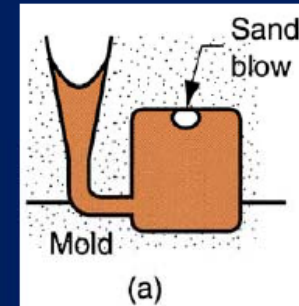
Common defects in sand castings: (a) sand blow
